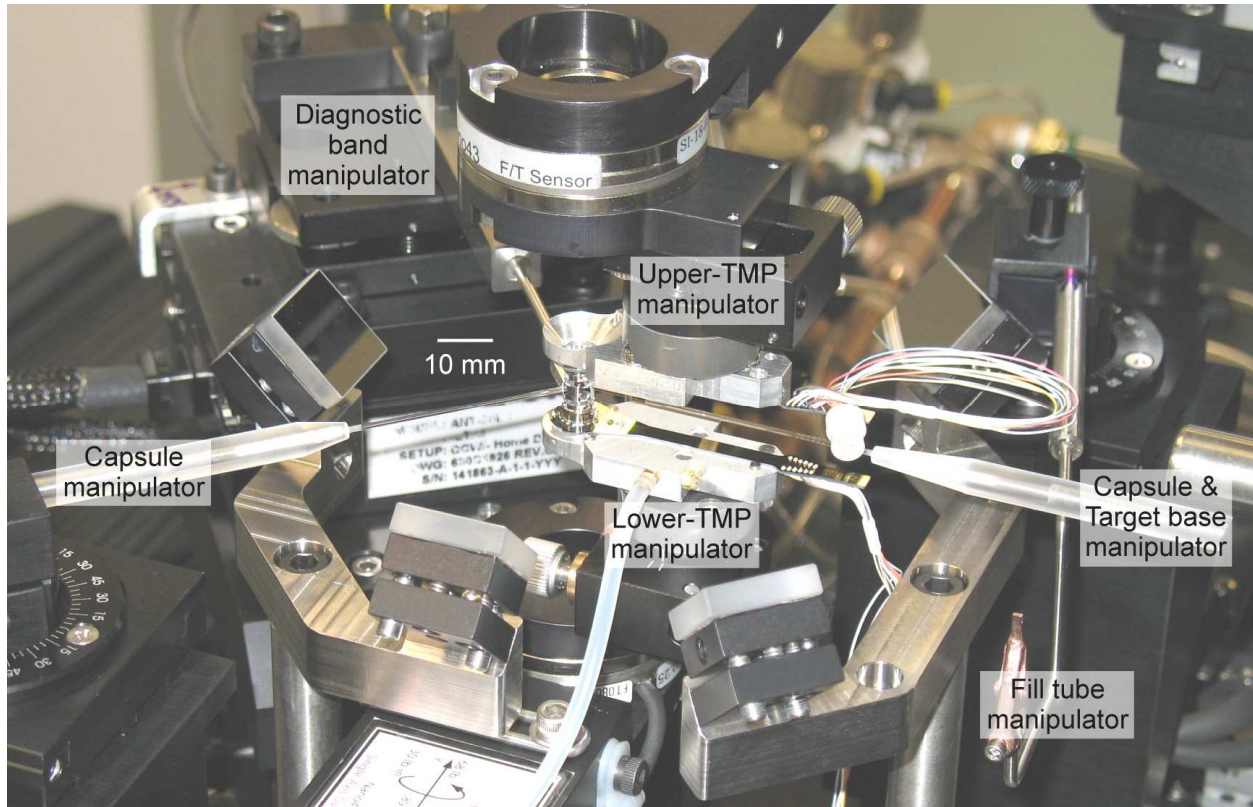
Close-up view of the operating arena in the manipulator system, with a target being assembled.
